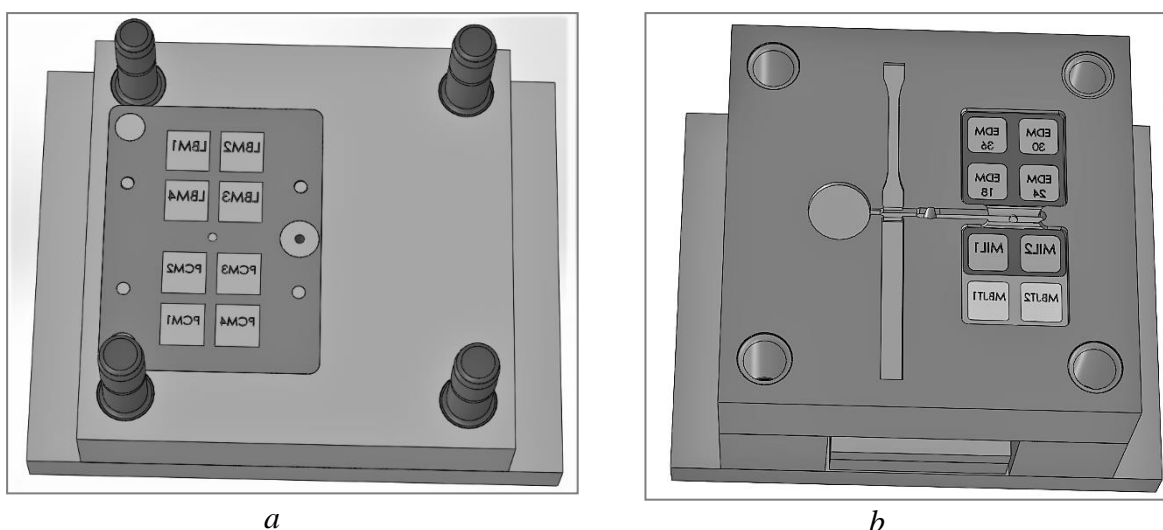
The mold a) injection side with laser (*LBM*) and photochemical machined (*PCM*) impressions; b) ejection side with the *EDM*, milled (*MIL*) impressions, and *MBJT* inserts
